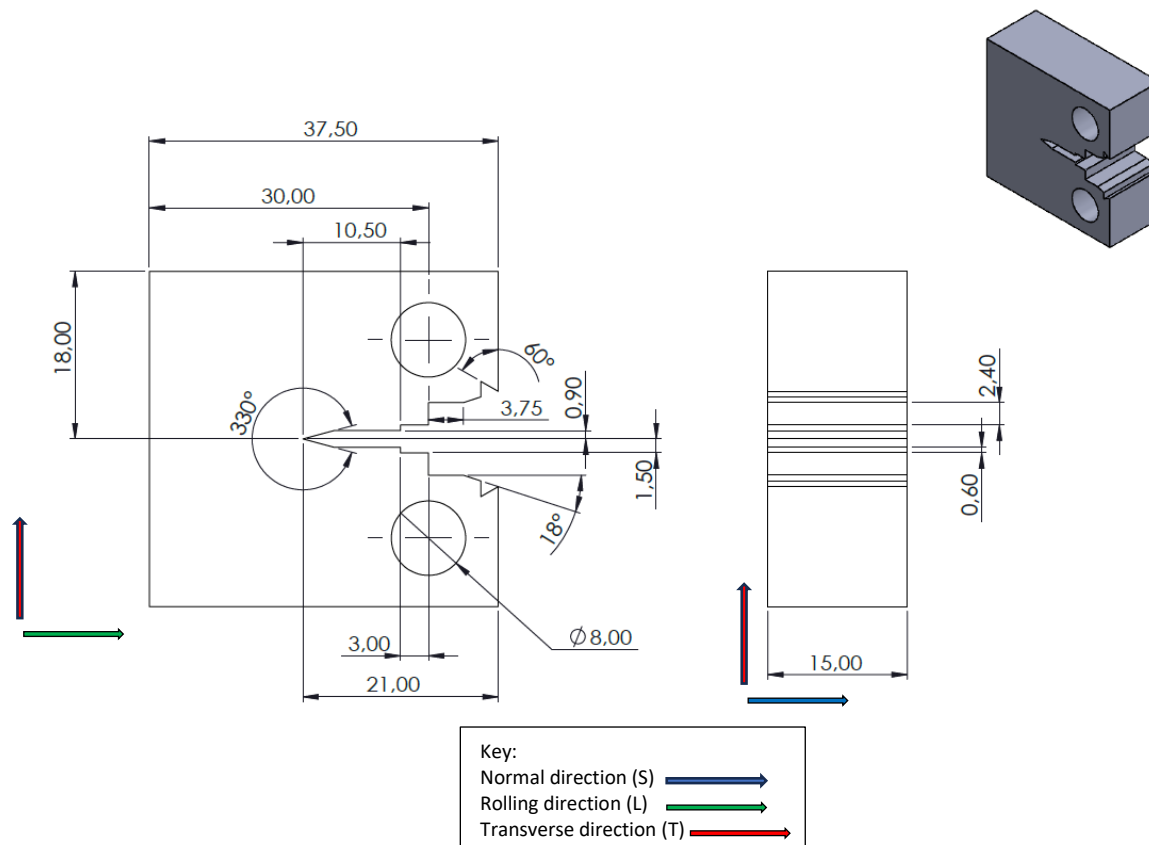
Drawing of ASTM E1820 fracture toughness specimen transferred to ASTM E399 test method
